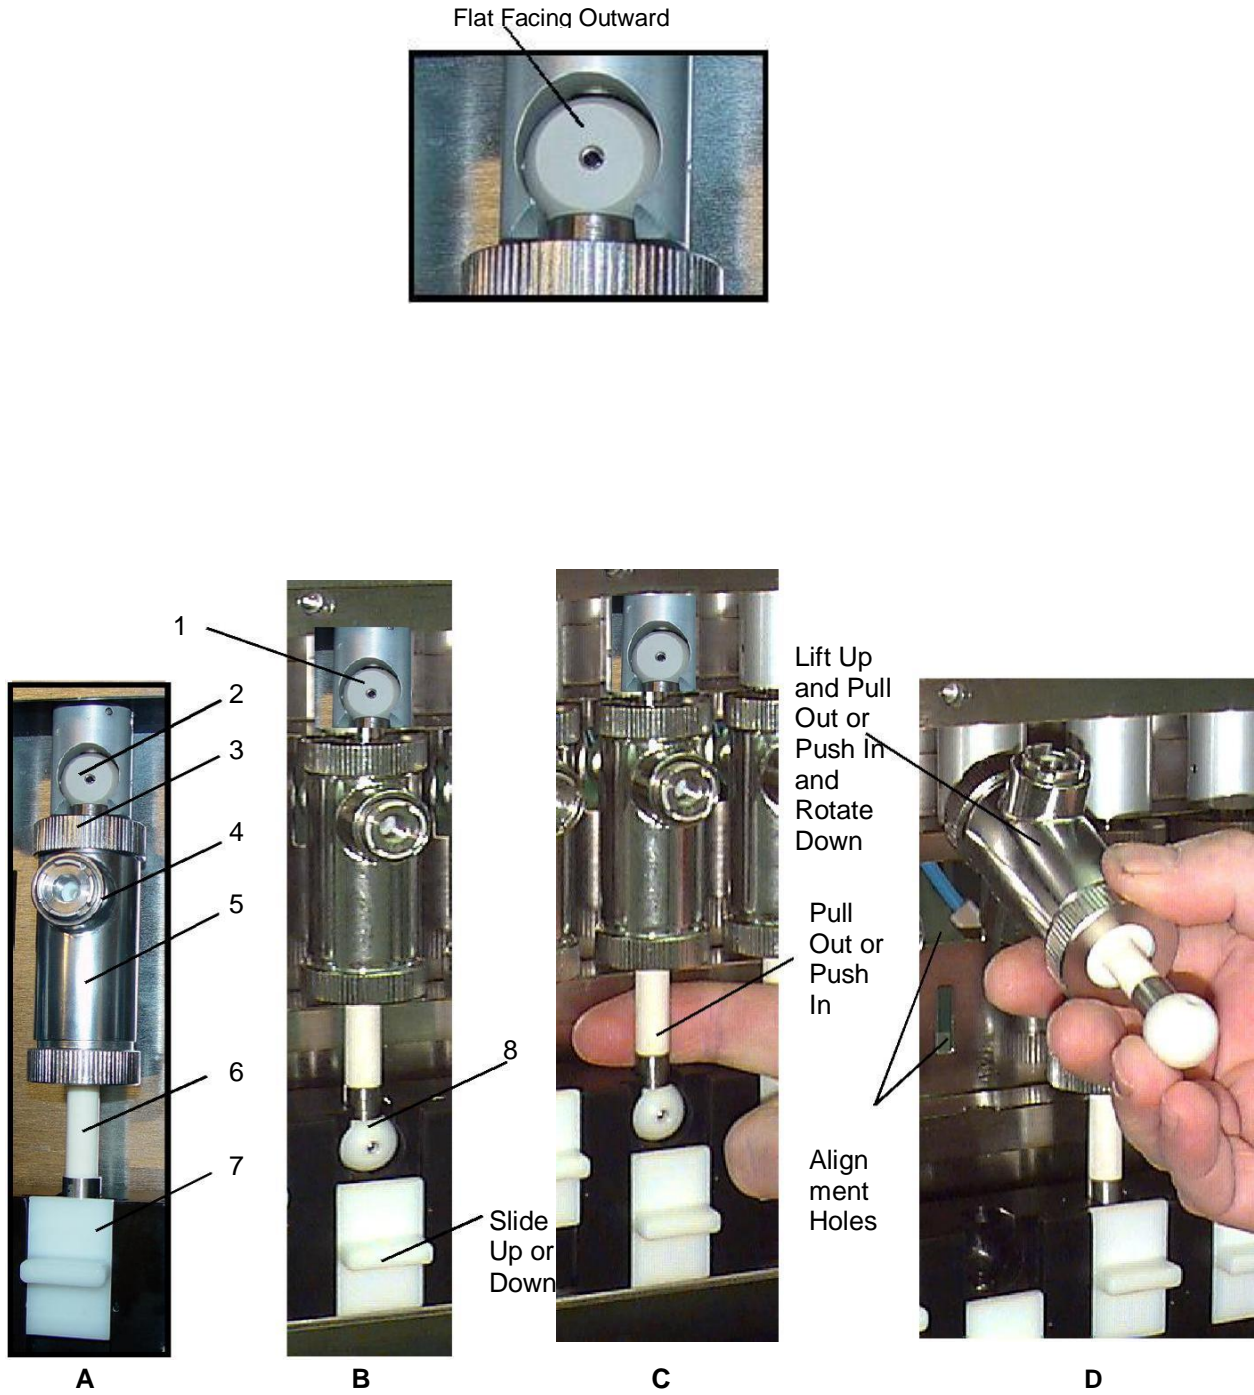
LF Multiplex Pump Module Assembly/Disassembly
